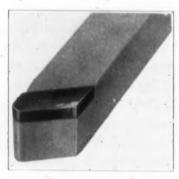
Photograph of Tool Sketched in Fig. 7.
